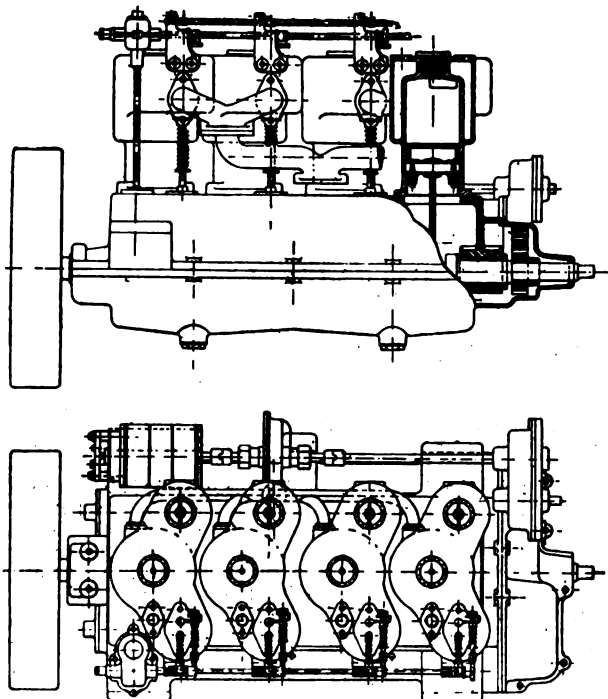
Part-sectional elevation and plan of Bental 16-h.p. engine.
